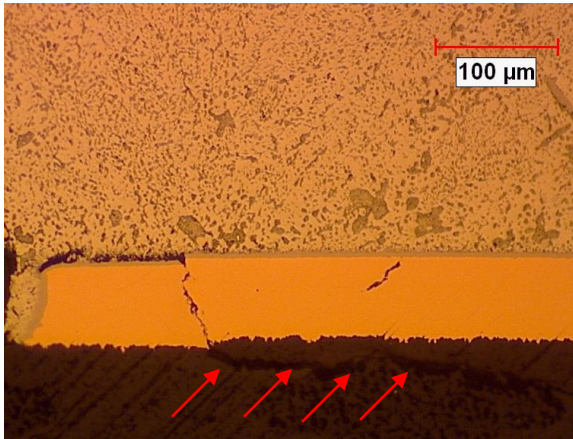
Board Side Failure (with Pad Crater) of BGA with SnPb Solder on ENEPIG Finish, 170 T_g Board
